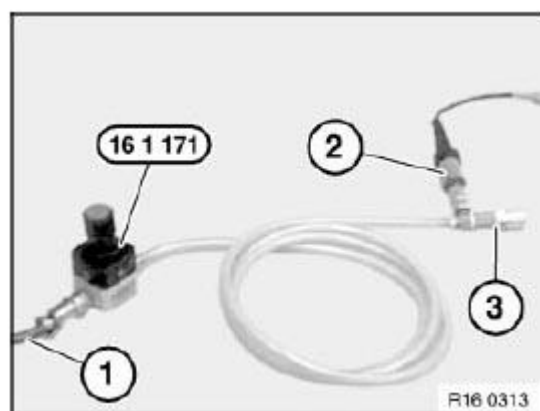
Identifying Air Line, Pressure Sensor And Fast-Release Coupling With Special Tool 16 1 171
